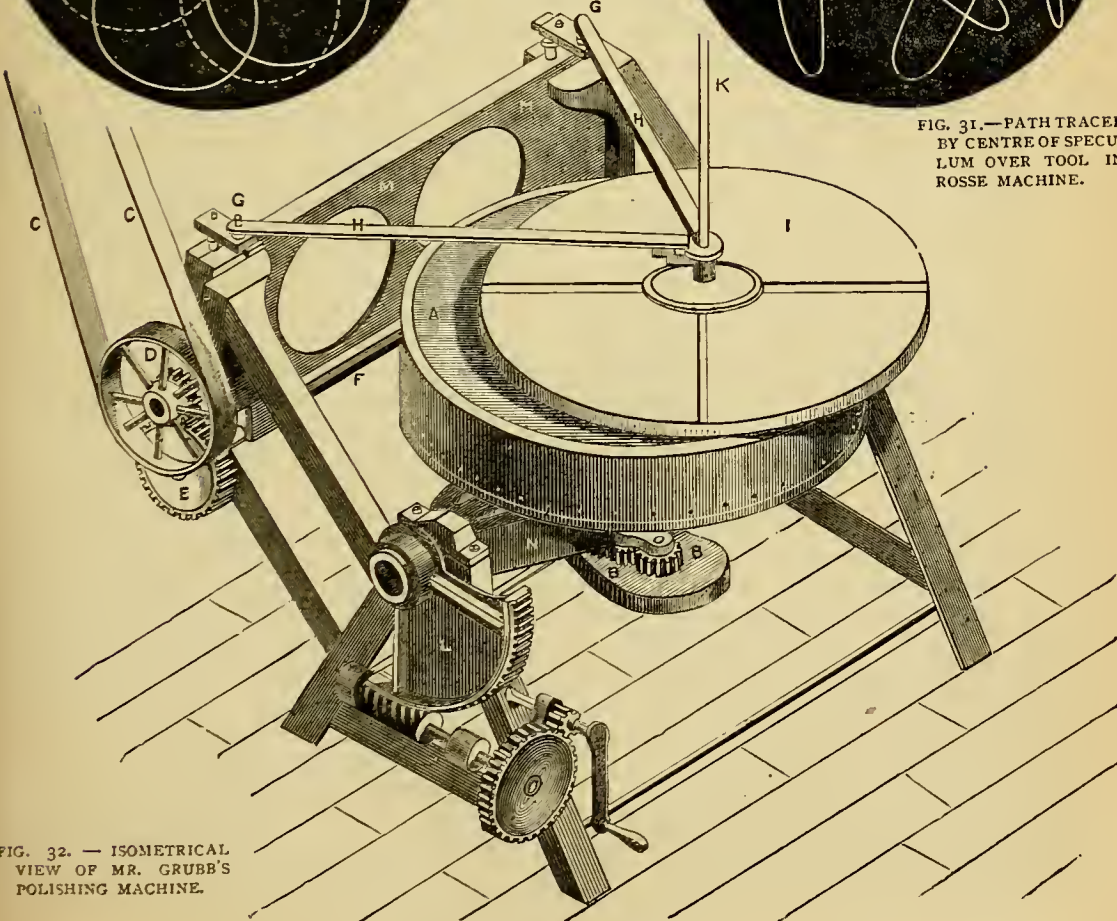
ISOMETRICAL VIEW OF MR. GRUBB'S POLISHING MACHINE.
